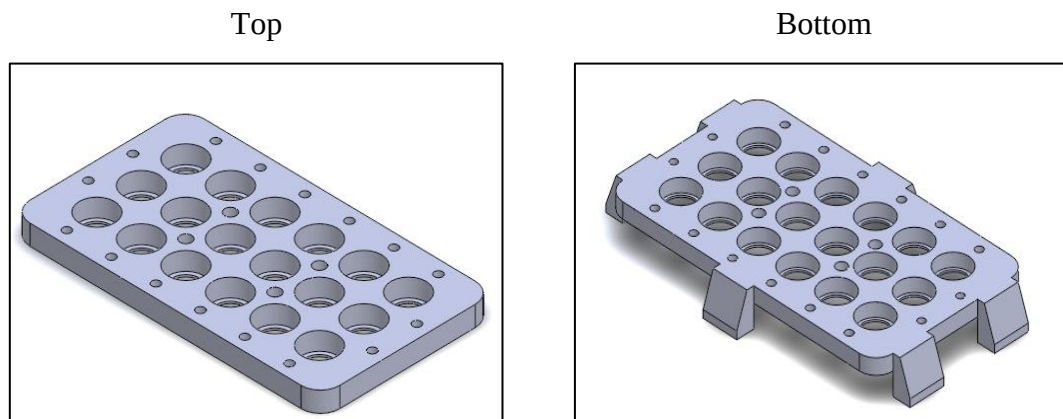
New Bracket Holder of Batteries with New Mechanism for Easy Disassembly Top& Bottom, Where the Space Between Them is 23mm from Center to Center.
